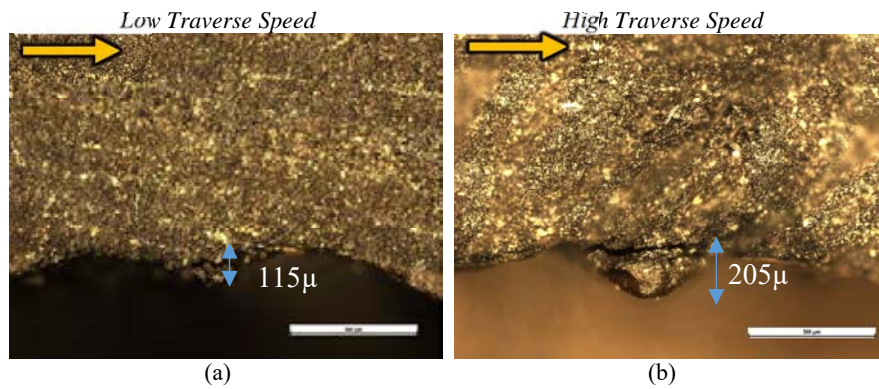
Optical micrographs of the bottom surface of AWJ machined specimen, machined with 5.3 g/s AFR, 200 MPa pressure and traverse speed (a) 5 mm/s, (b) 19 mm/s.
